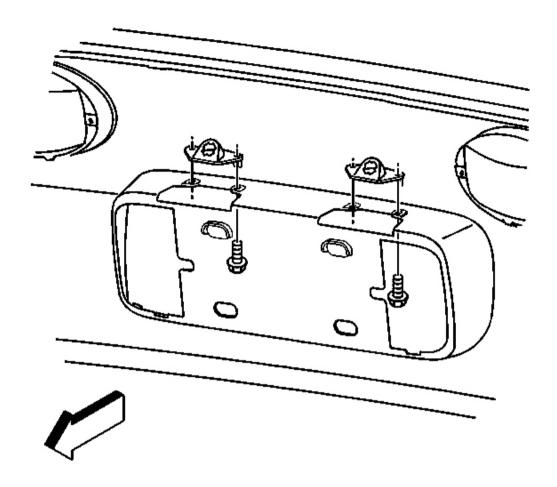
License Lamp Assembly To Tail Lamp Opening Courtesy of GENERAL MOTORS CORP.
